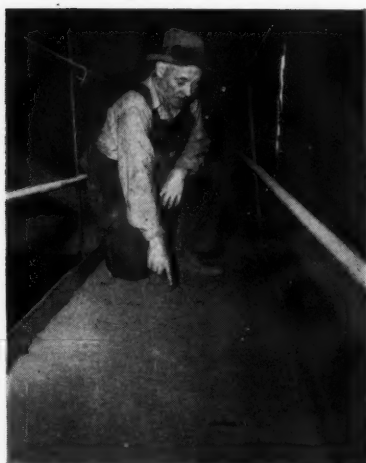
Welding foreman inspects scrap iron walk over leaching tanks
